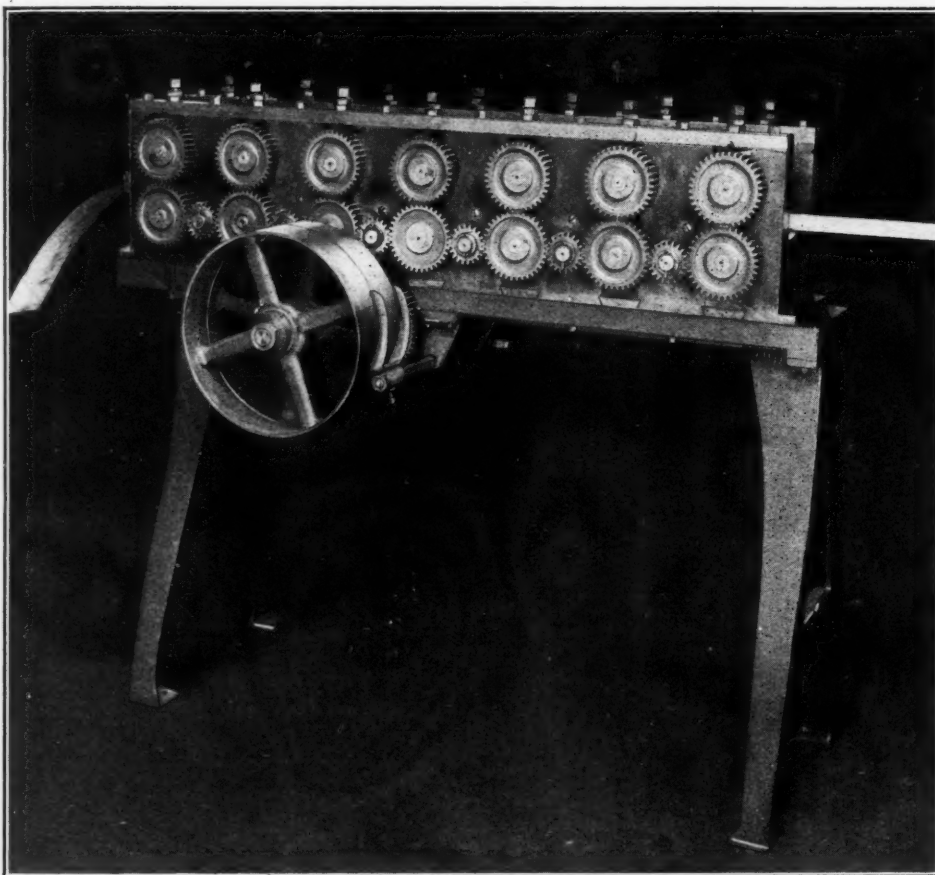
Cadwell-Vernon Sheet-metal Rolling Machine
